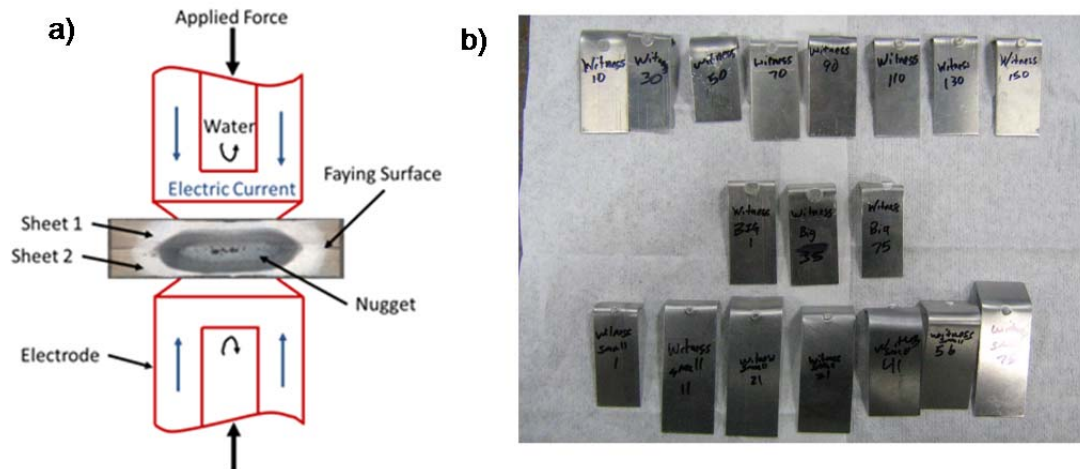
Overall view of resistant spot welding (RSW) with destructive testing
